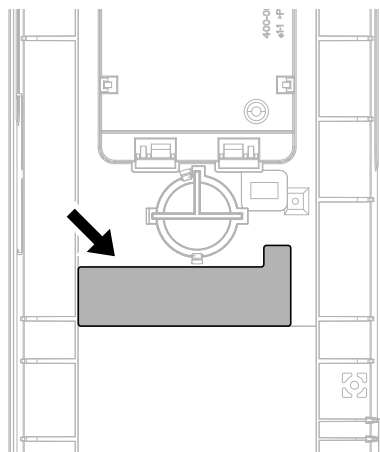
Tightening Torque Display Location (Reverse side of Front Cover)
